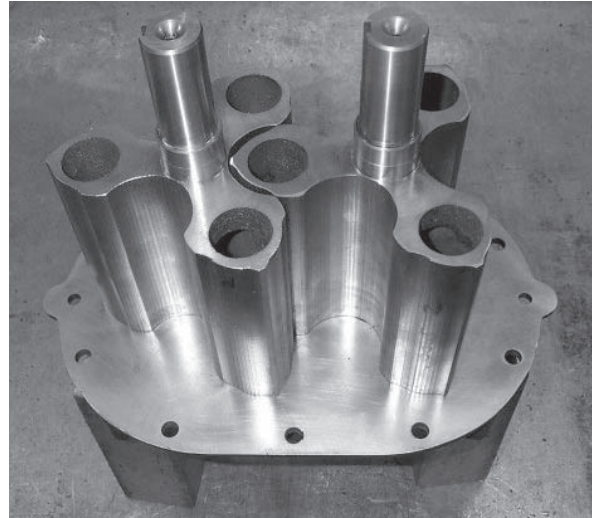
Rotors Assembled on Drive End Plate (Model 4000 with Tri-Lobe Rotors Shown)
